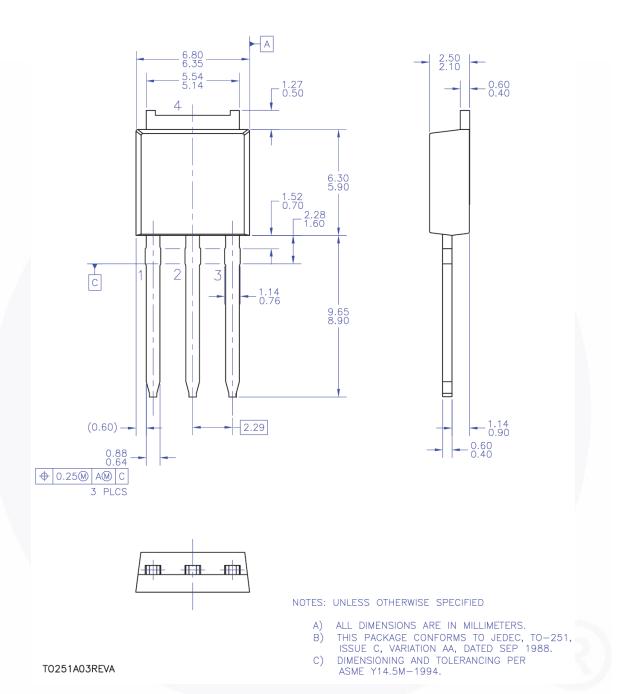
TO251 (I-PAK), Molded, 3-Lead
